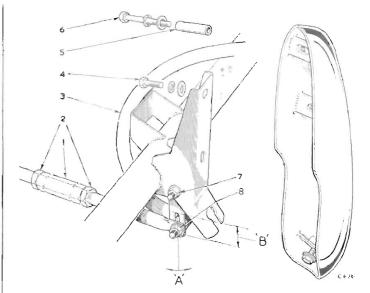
Bonnet adjusting points (Herald 1200, 12/50 and Vitesse)
